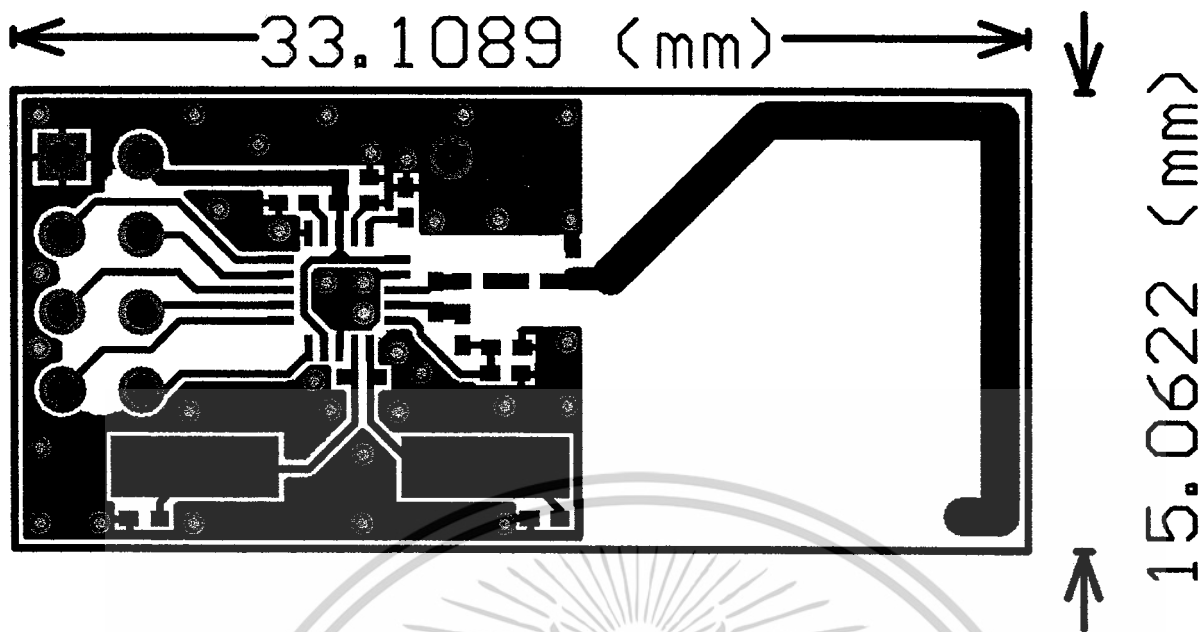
Top layer (nRF24L01 RF layout with single ended connection to PCB antenna and 0402 size passive components)
